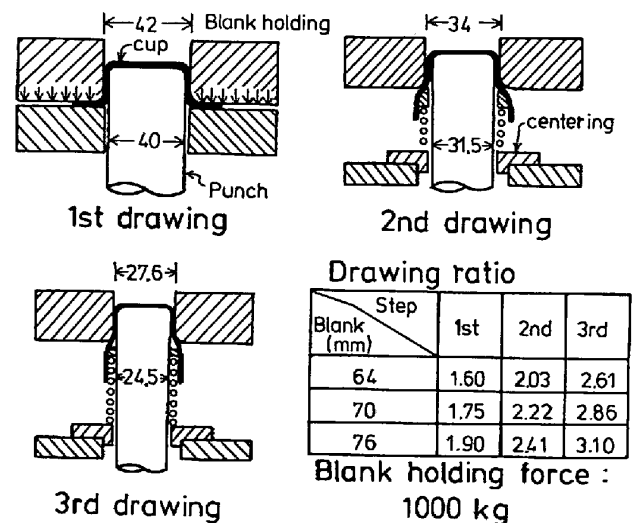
Dimension of drawing apparatus used for deep drawing.
